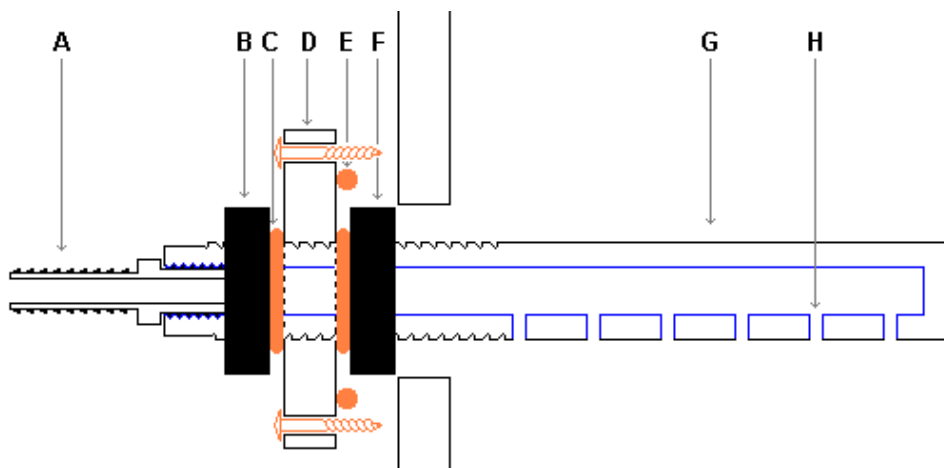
Diagram of PLS injection port. (A – barbed fitting, B – outer tightening nut, C – o-ring, D – Perspex™ fitting section, E – o-ring, F – inner tightening nut, G – main shaft, H – discharge holes)
